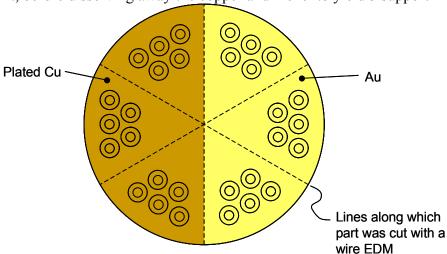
Pattern of 6 sets of 5 target support rings machined into each mandrel
